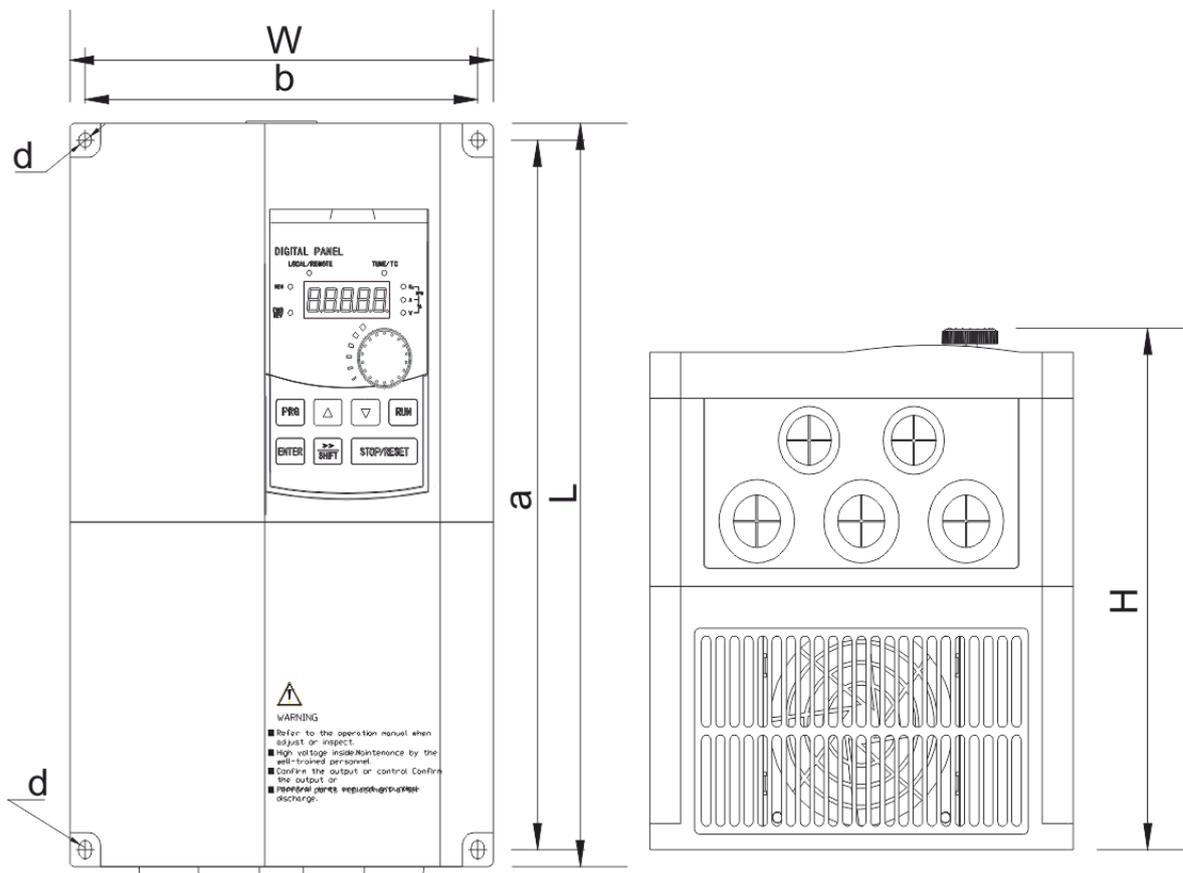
Dimensions of the inverter and placement of the mounting holes.
